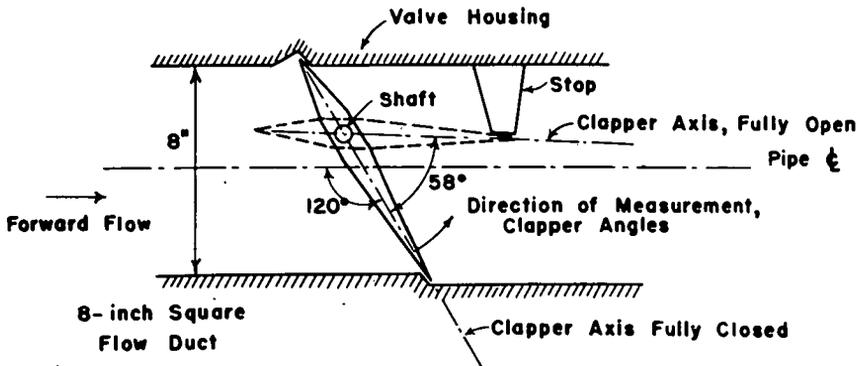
DETAILS OF BUTTERFLY SWING CHECK VALVE "H".
